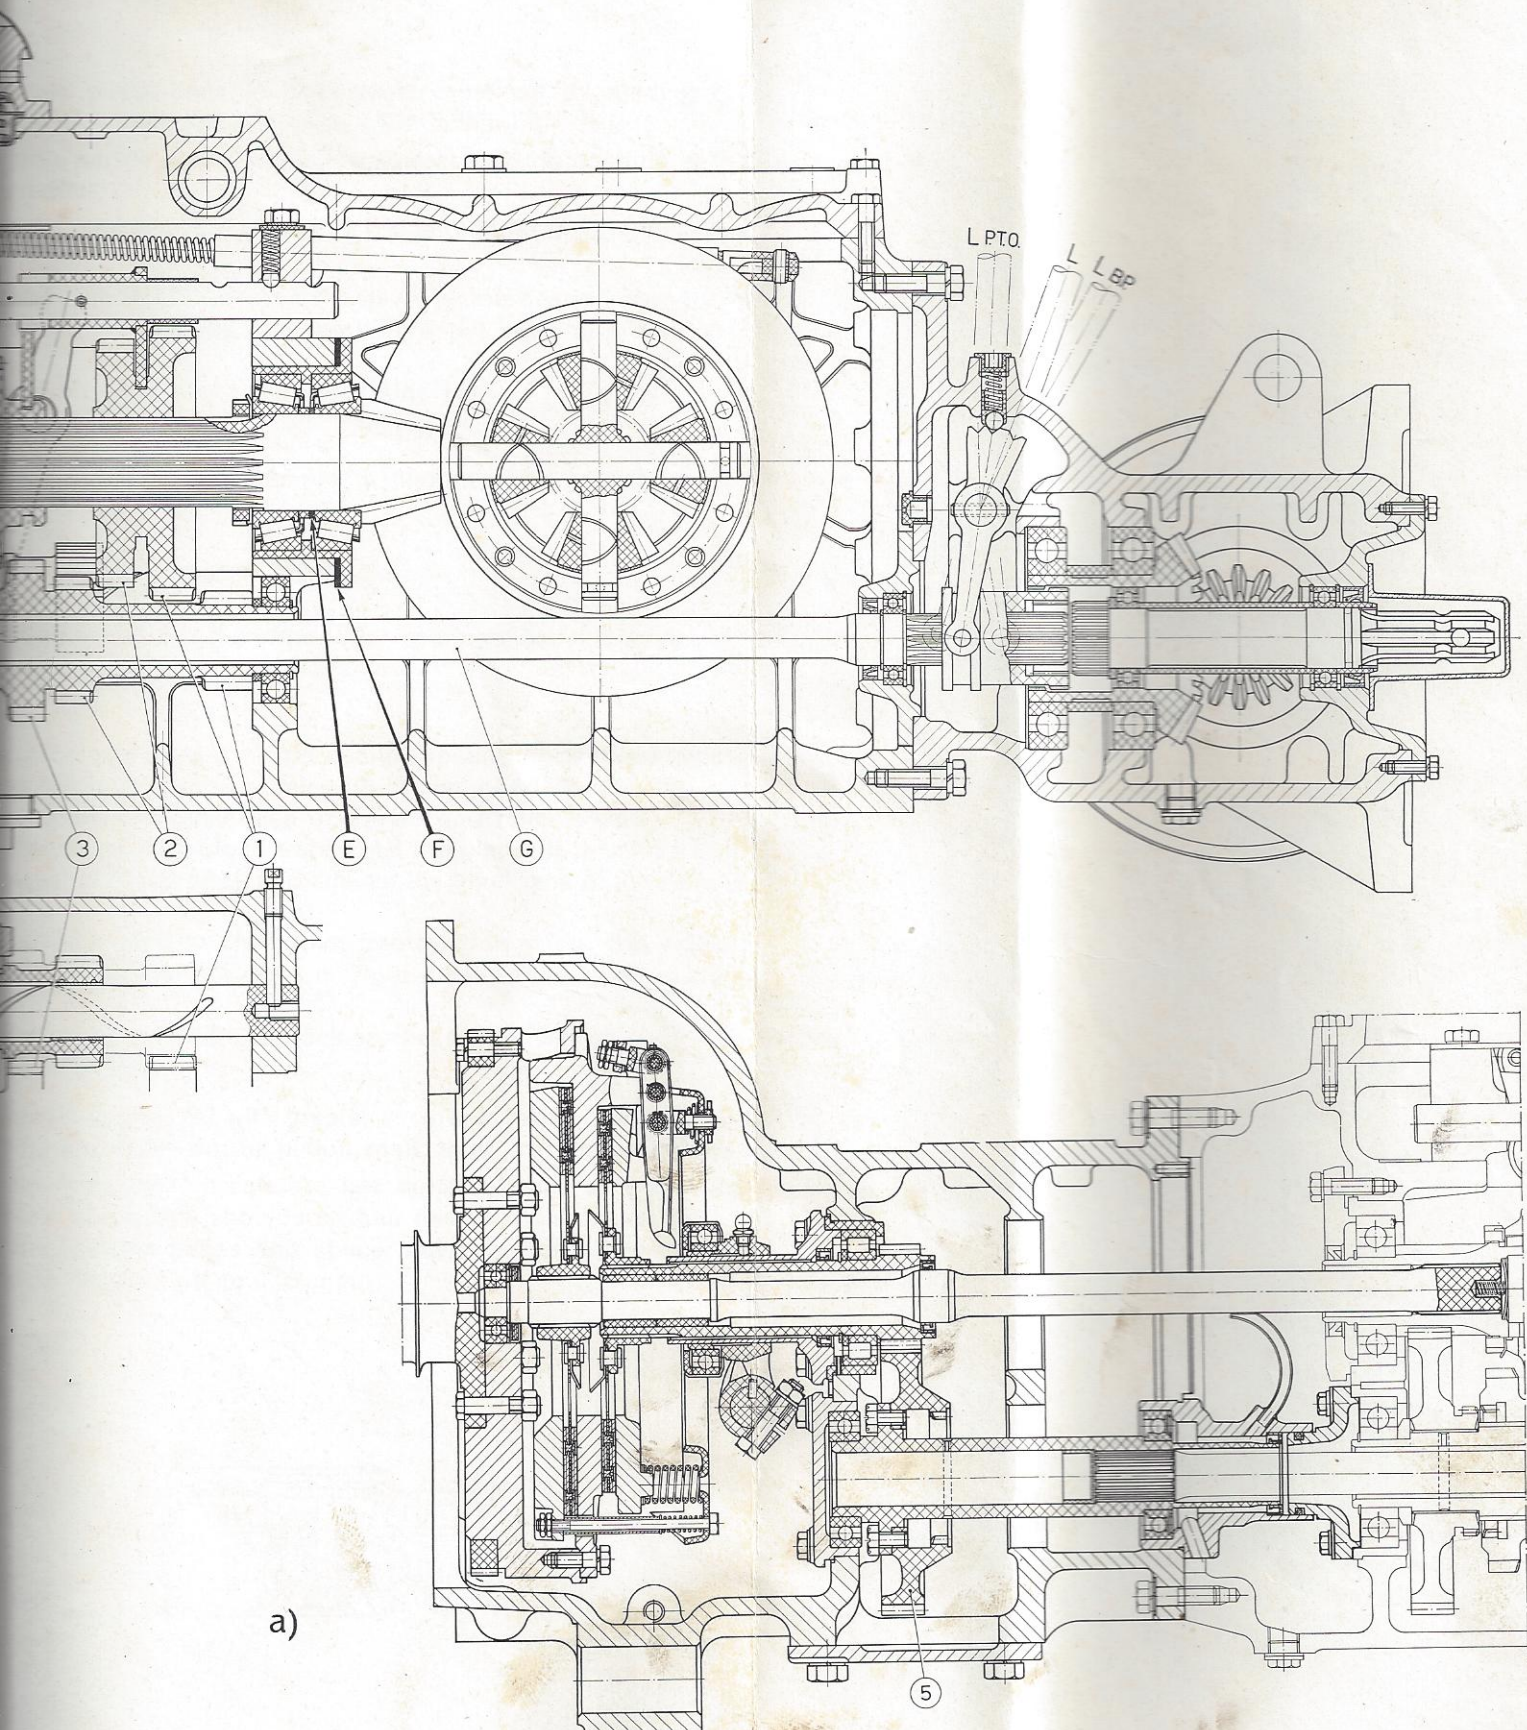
Longitudinal section of gearbox, bevel pinion and P.T.-O. unit.
